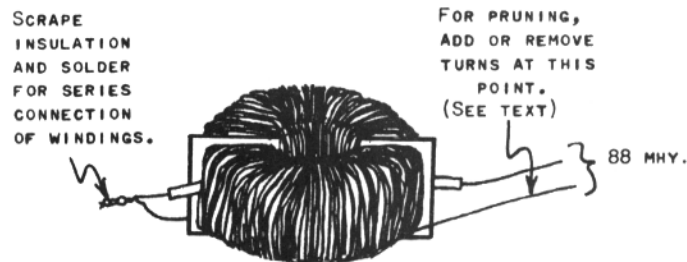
THE 88 MILLIHENRY TOROIDAL INDUCTOR.
